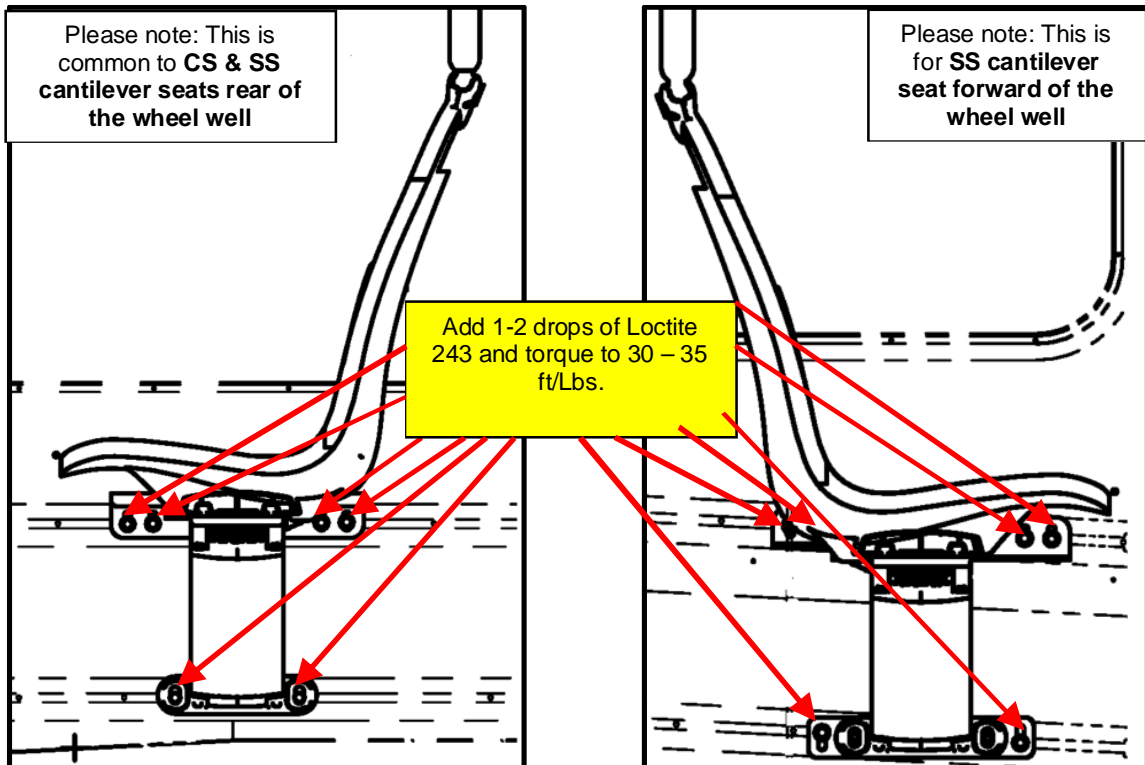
Check Mounting Hardware & Torque to Spec if Required
